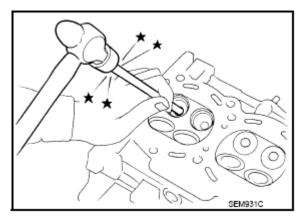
Driving Out Valve Guide Using Hammer And Guide Drift Courtesy of NISSAN NORTH AMERICA, INC.
